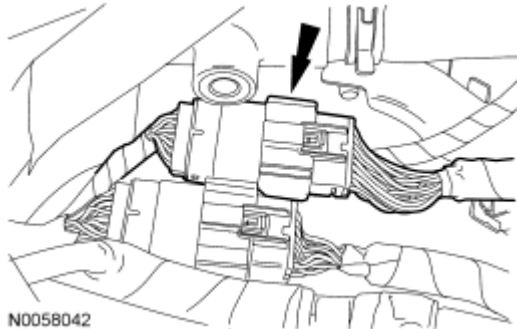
Locating Transmission Connector Wire Harness Pin-Type Retainer
